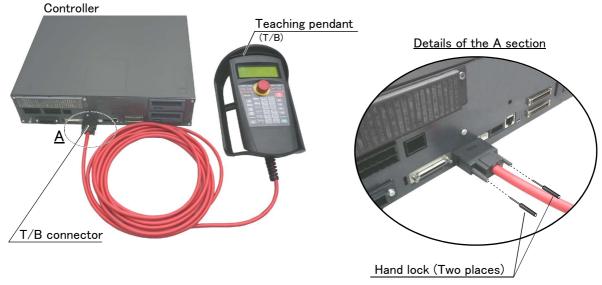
Installing and removing the T/B (CR751 controller)
